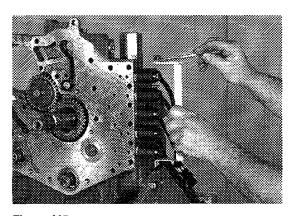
Install solenoid protection cover and mounting screws. Tighten screws to specified torque.
